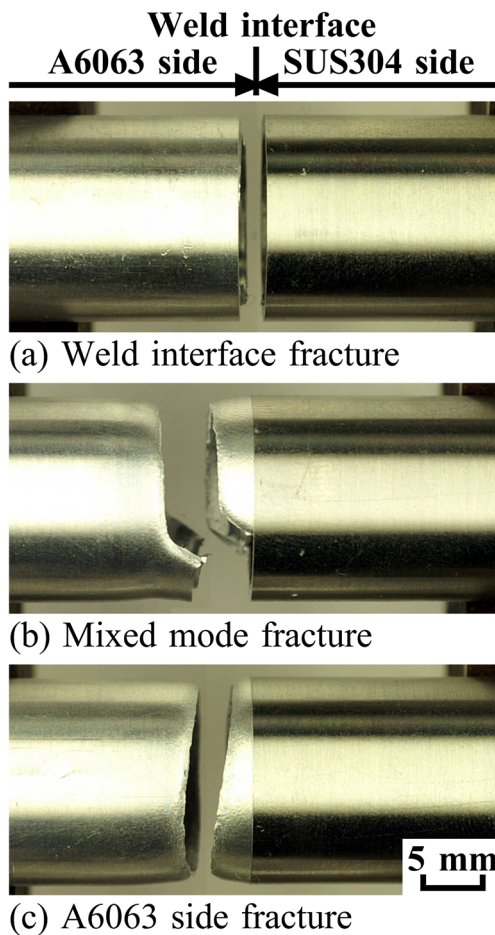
Examples of appearances of joint tensile-tested specimens without flash: a weld interface fracture, b mixed mode fracture, and c A6063 side fracture
